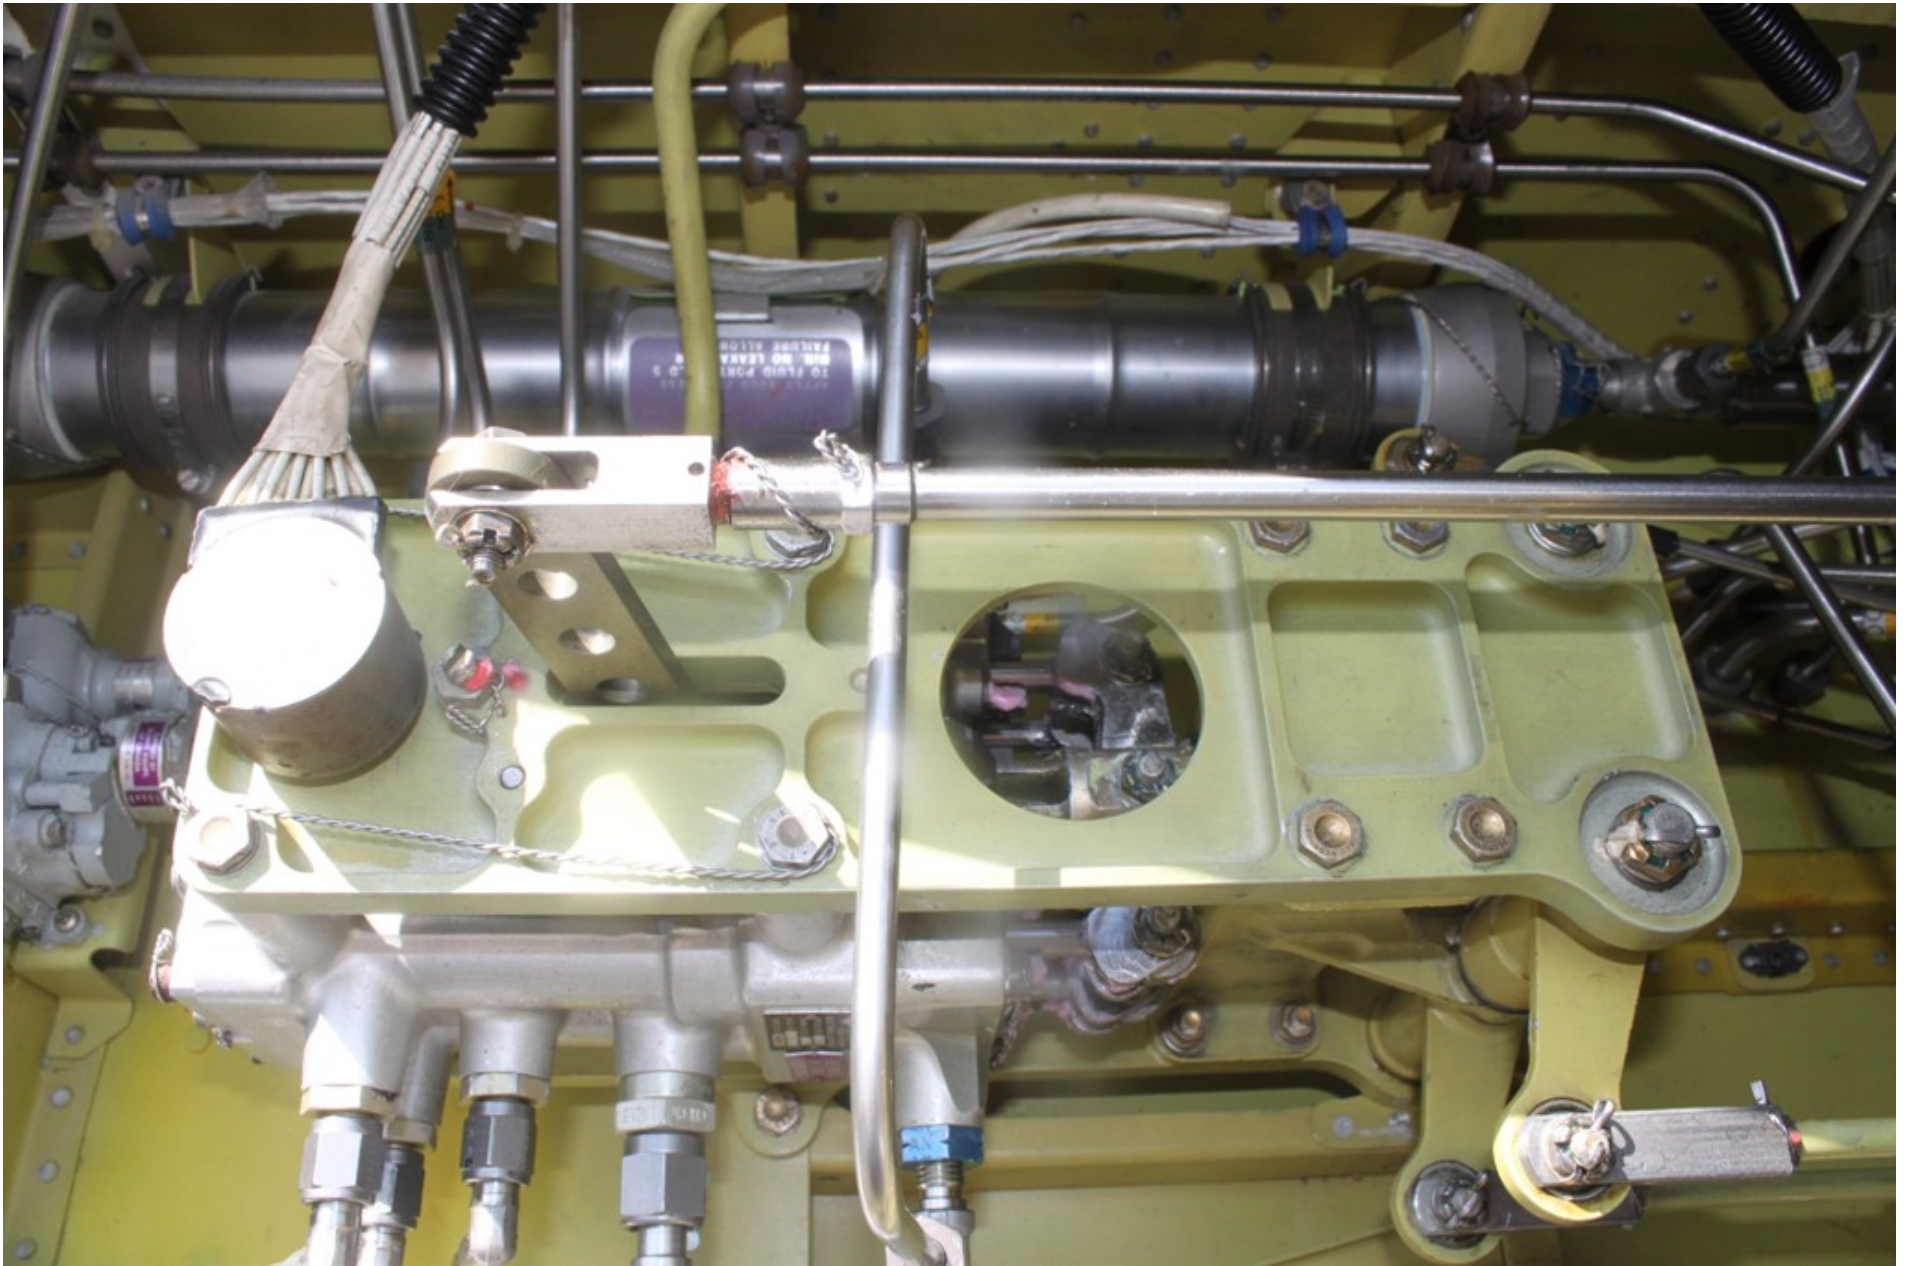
NTSB Photograph. View Depicting the Upper and Lower Brake Control Valves
